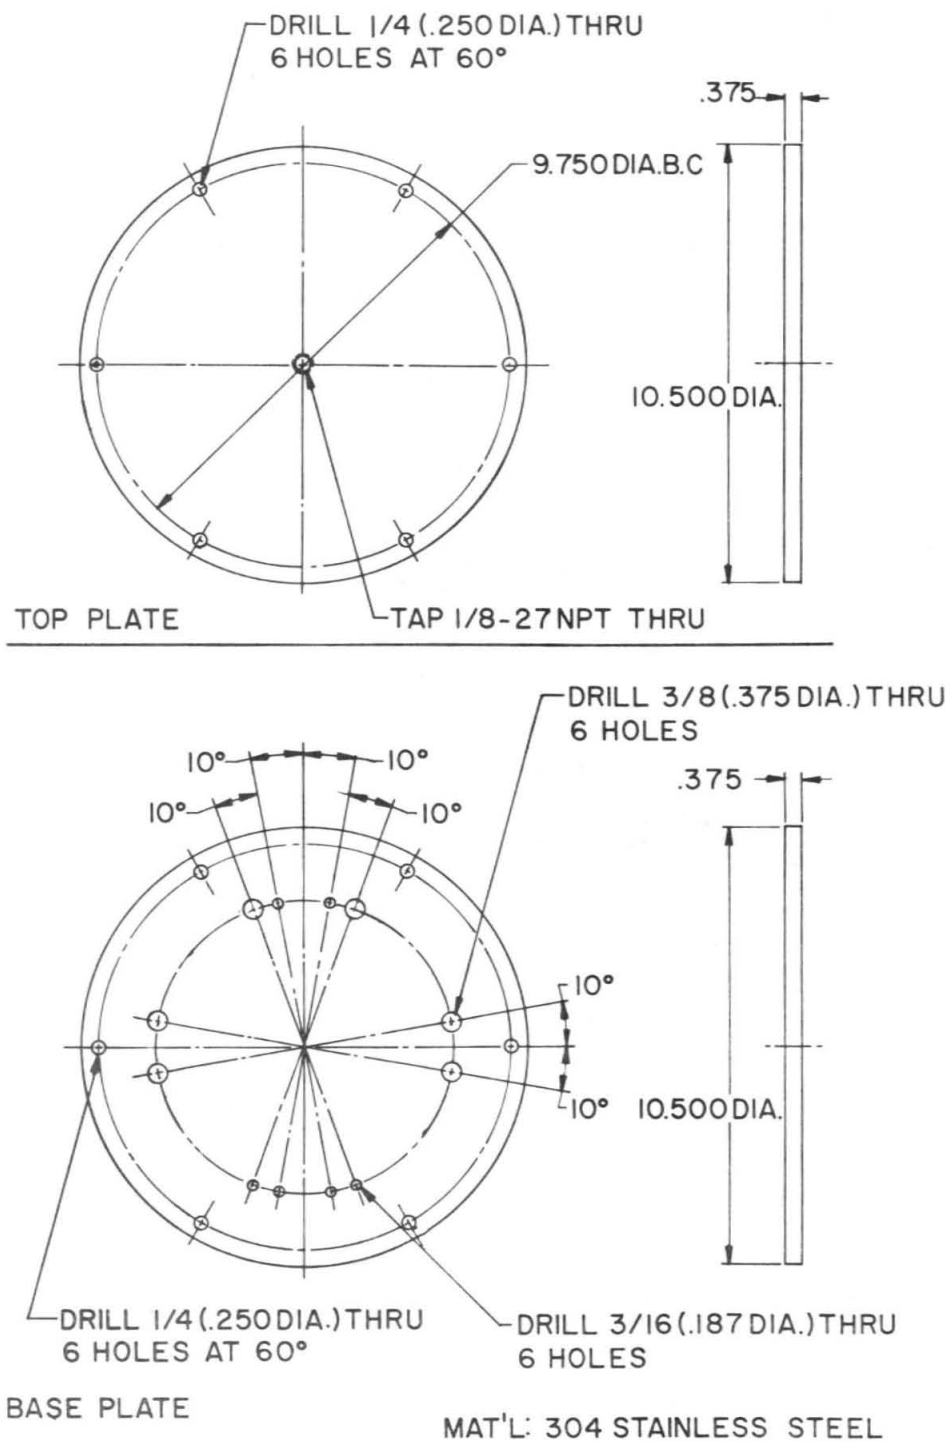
Drawing showing vacuum tank top and base plates. Dimensions are in inches.
